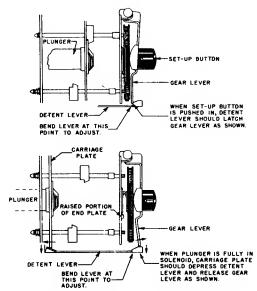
GEAR LEVER LATCH ADJUSTMENT
